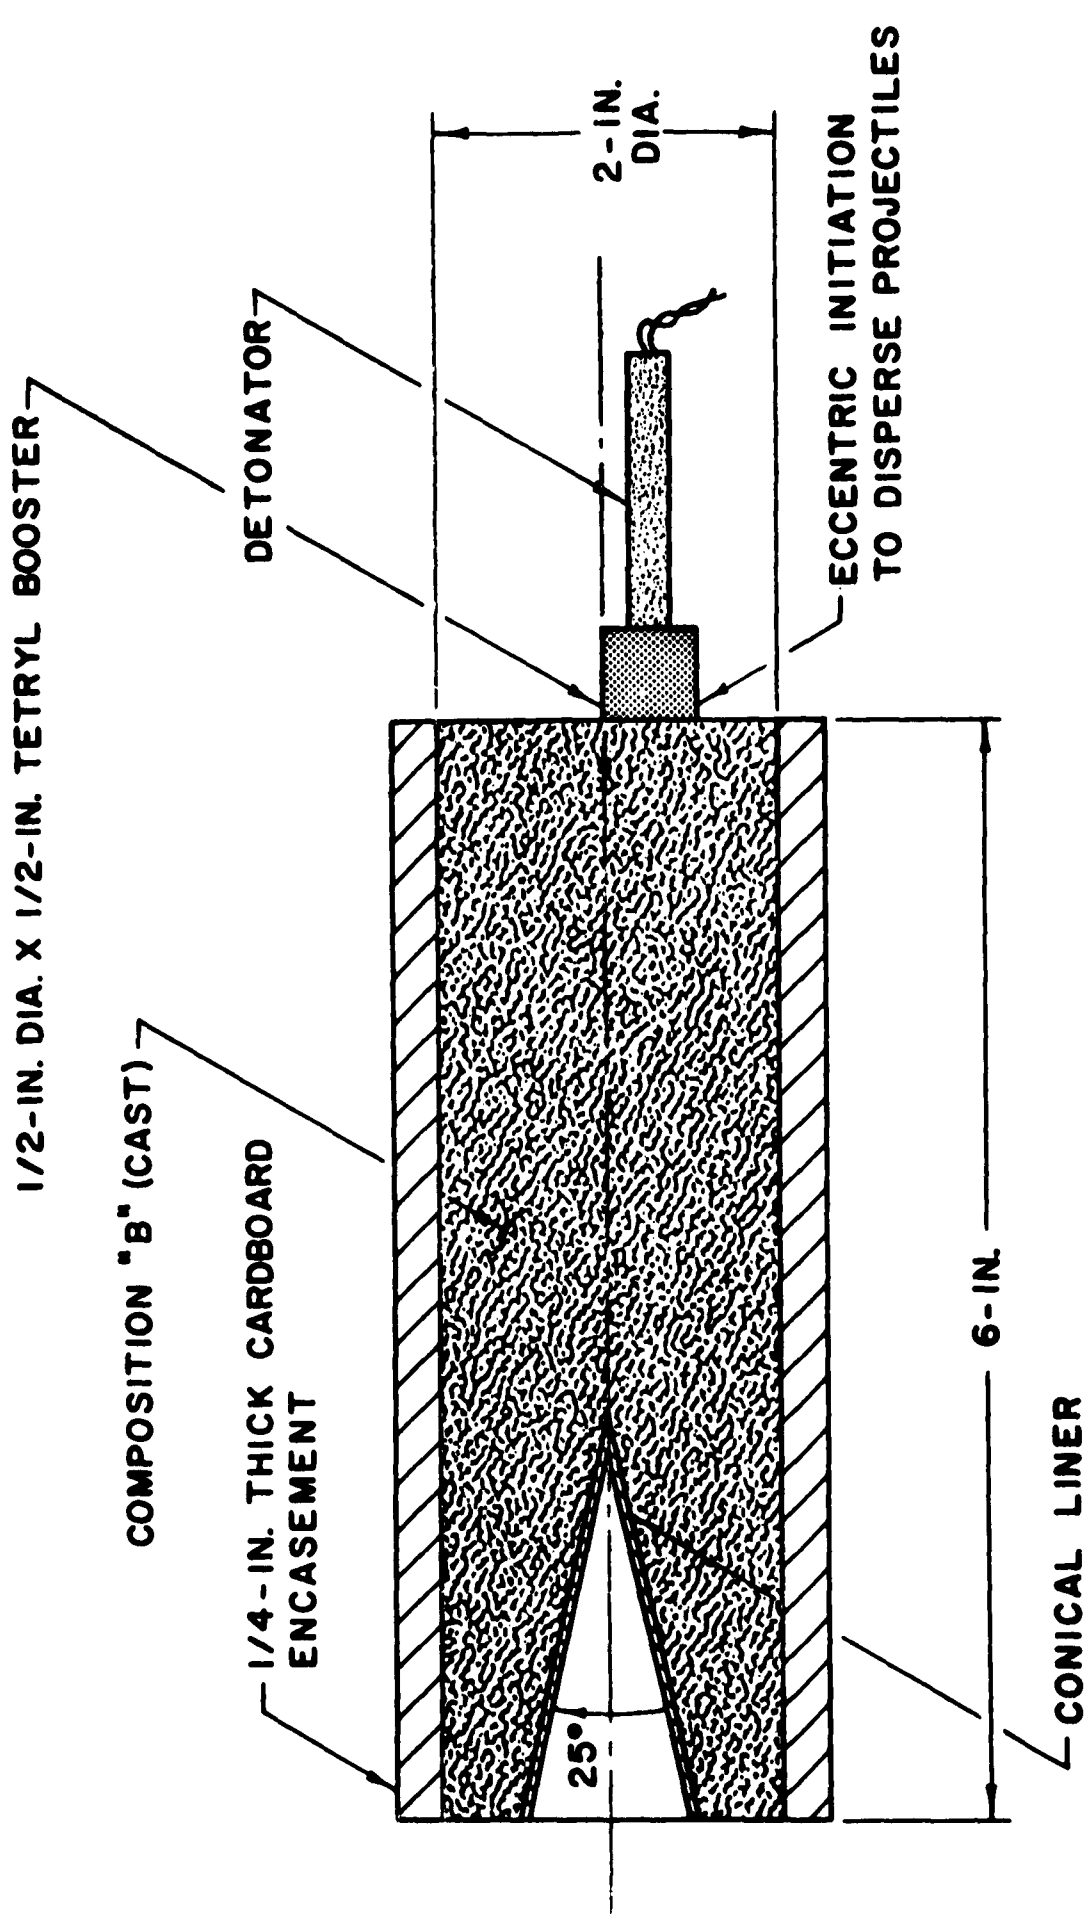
SHAPED CHARGE EXPLOSIVE PROJECTOR
